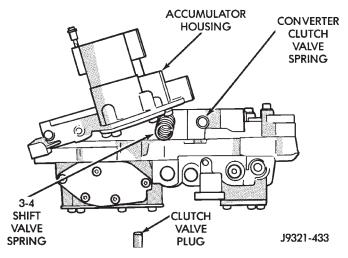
3-4 Shift And Converter Clutch Valve Springs And Plug
